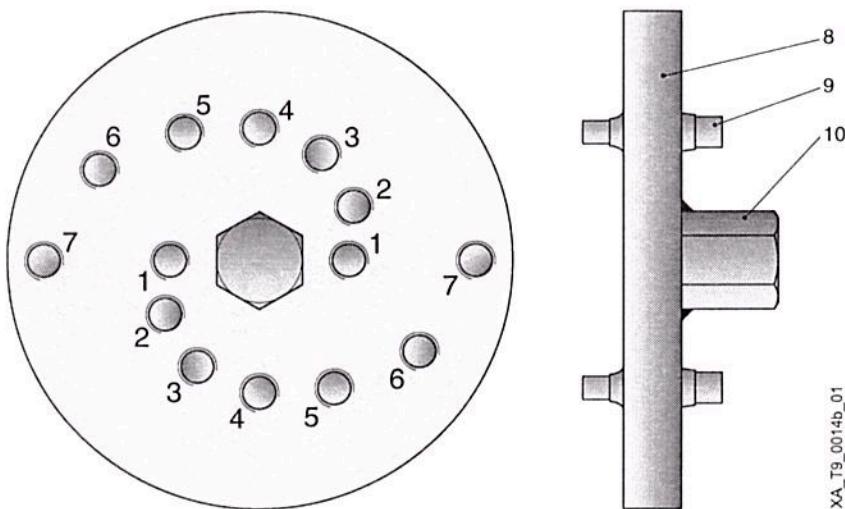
Piston nut wrench for piston nut SUPERBOLT® (position 1–7 = SUPERBOLT® size)
